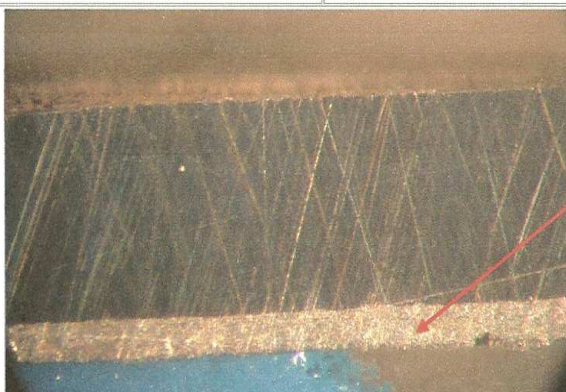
Section of serviceable bearing showing aluminium layer (stereo)
